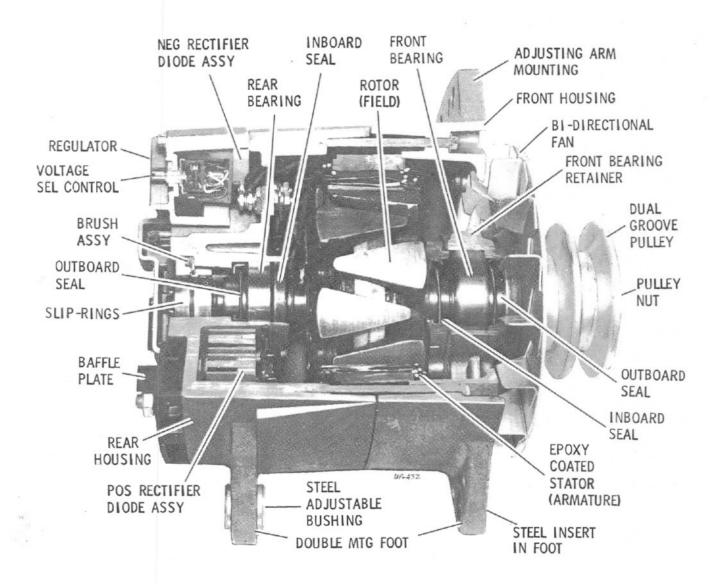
CUTAWAY VIEW OF TYP. ALT.
